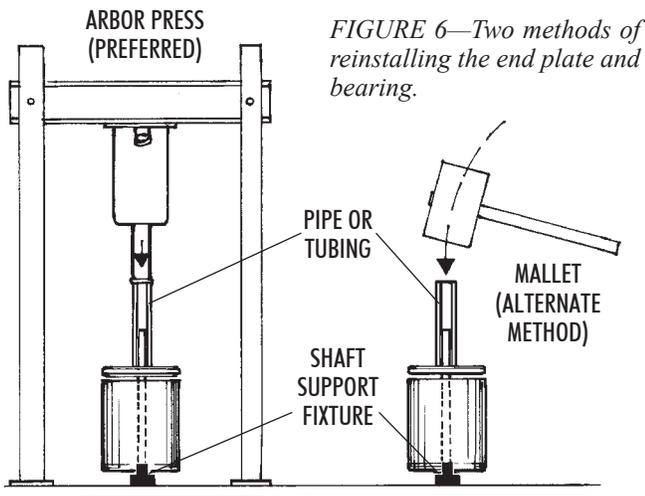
Two methods of reinstalling the end plate and bearing.
